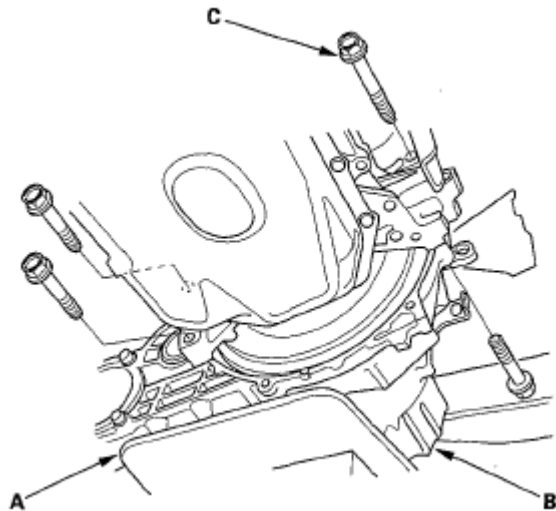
Identifying Transmission, Transmission Jack And Lower Transmission Mounting Bolts
